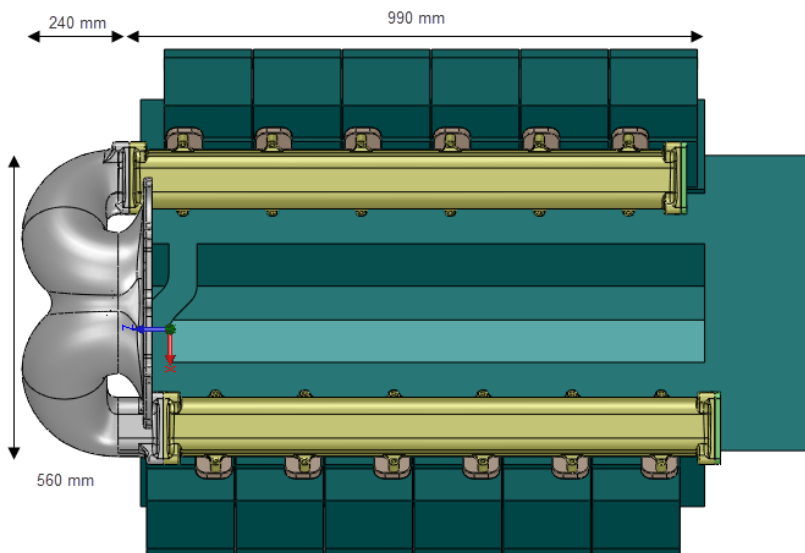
Rough dimension drawing for Rocket sled concept, top view
